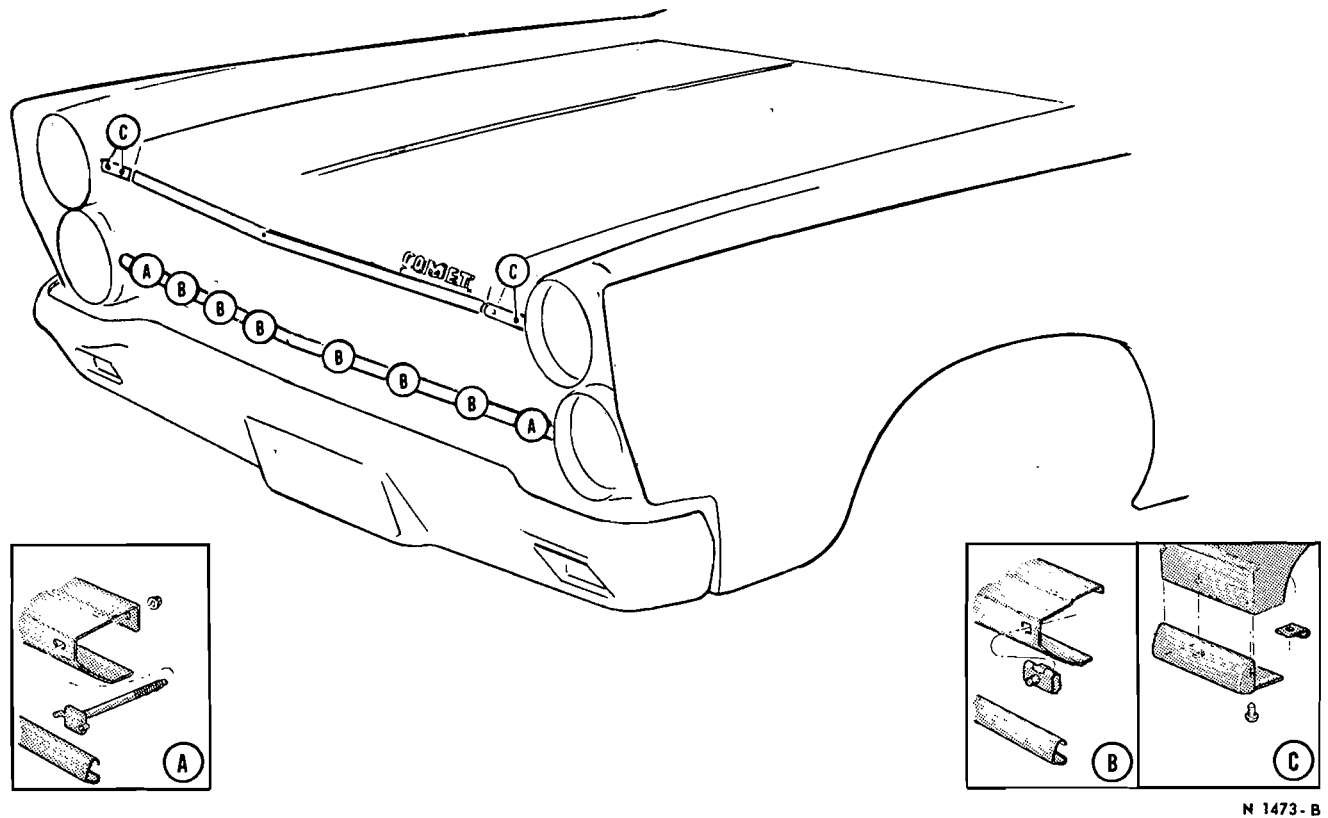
Mercury Intermediate Exterior Front Mouldings
